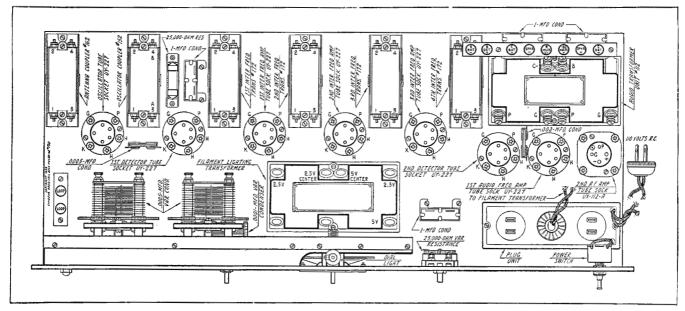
Layout of all parts should be made in accordance with the baseboard diagram printed above
